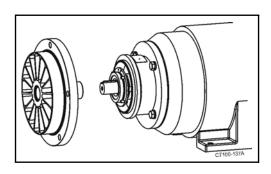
Remove Impeller, Backplate and Seal Assembly
